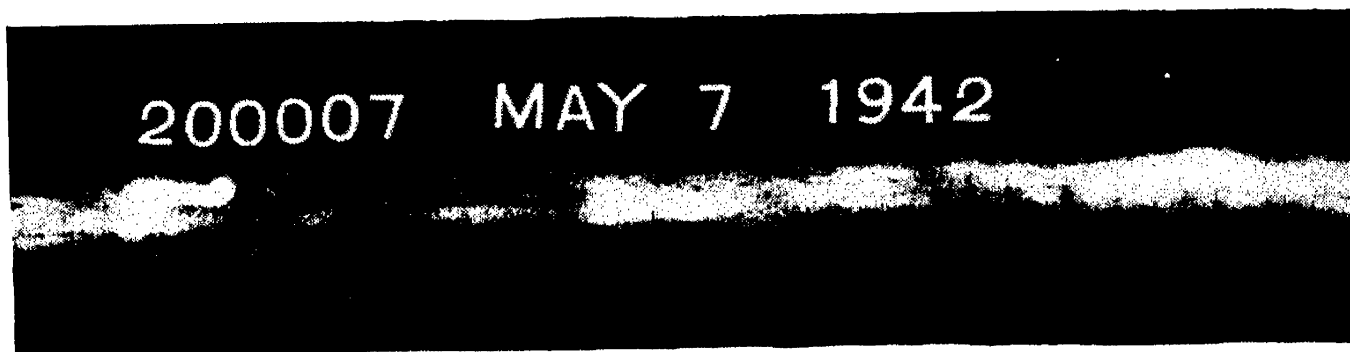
Slag inclusions in arc weld in steel plate.
